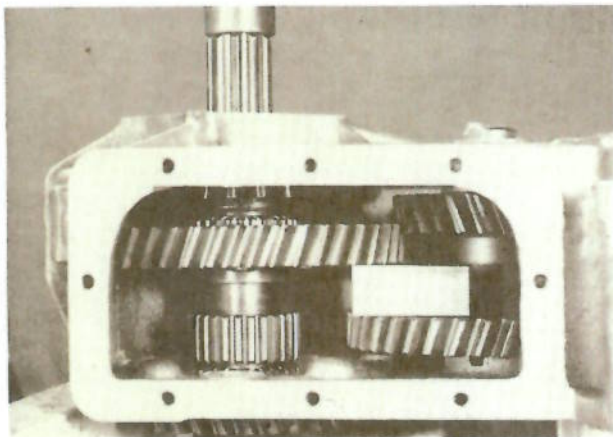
REMOVING THE DRIVE SHAFT FROM THE TRANSFER CASE.
